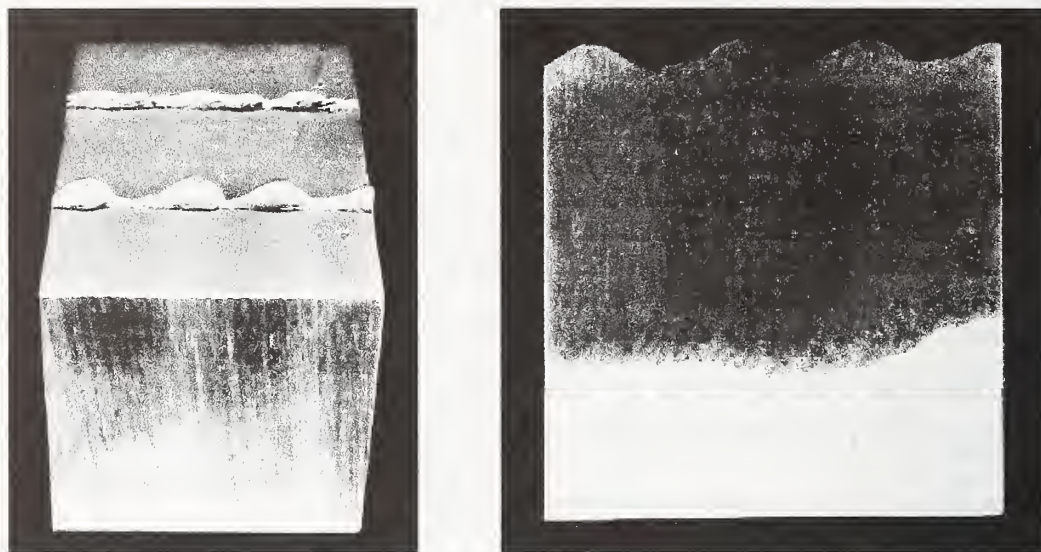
View of the upper bead of a EStE 355 weld sample (l) and view of the longitudinal section (r). The weld parameters are 150kV, 18kW, 15mm/s, surface focused. The Humping-Effect and the Spiking-Effect are good to recognise. The difference between the minimal and maximal depth of the weld is about 7 mm.
